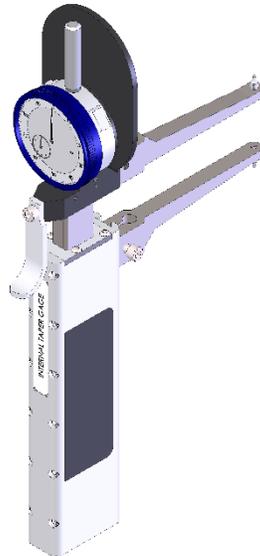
Internal Taper Caliper (Rod-style) for 4-1/2 in. OD and larger with Gauge Extensions
